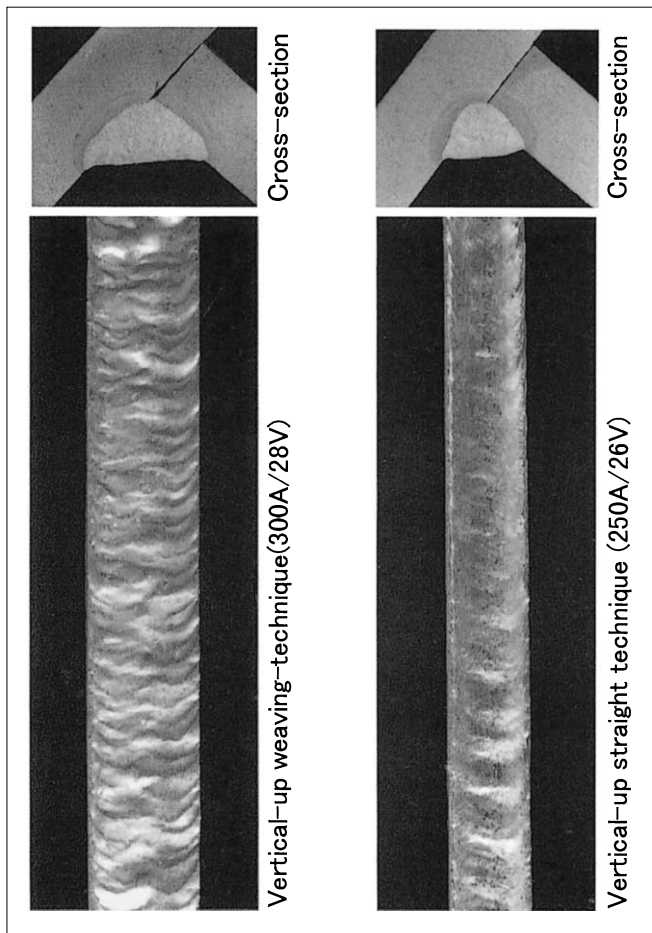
Typical bead profiles of DW-100V, offering smoother surface and sufficient weld penetration in vertical-up welding by means of the weaving and straight techniques (wire dia: 1.2 mm)
